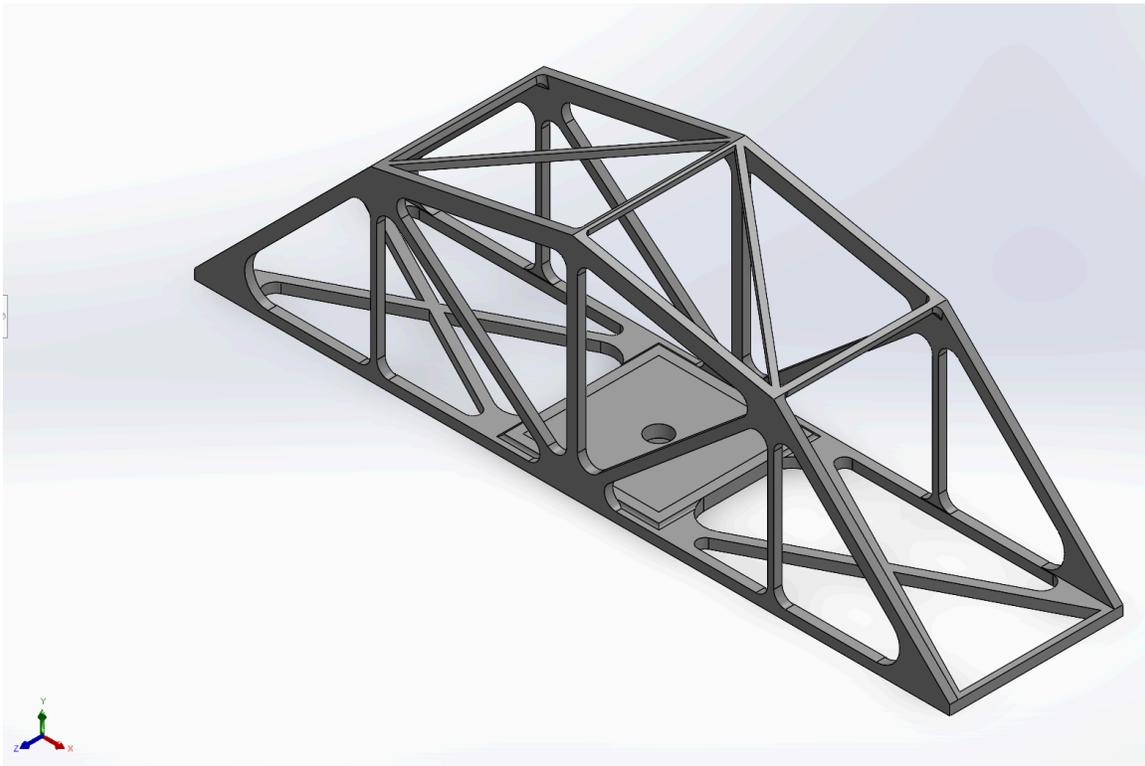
Our fourth model- a Camelback Truss with fewer but thicker support beams and one less section on each side
